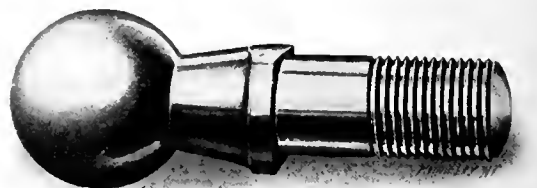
Piece Milled on the Multiple Spindle Screw Machine
